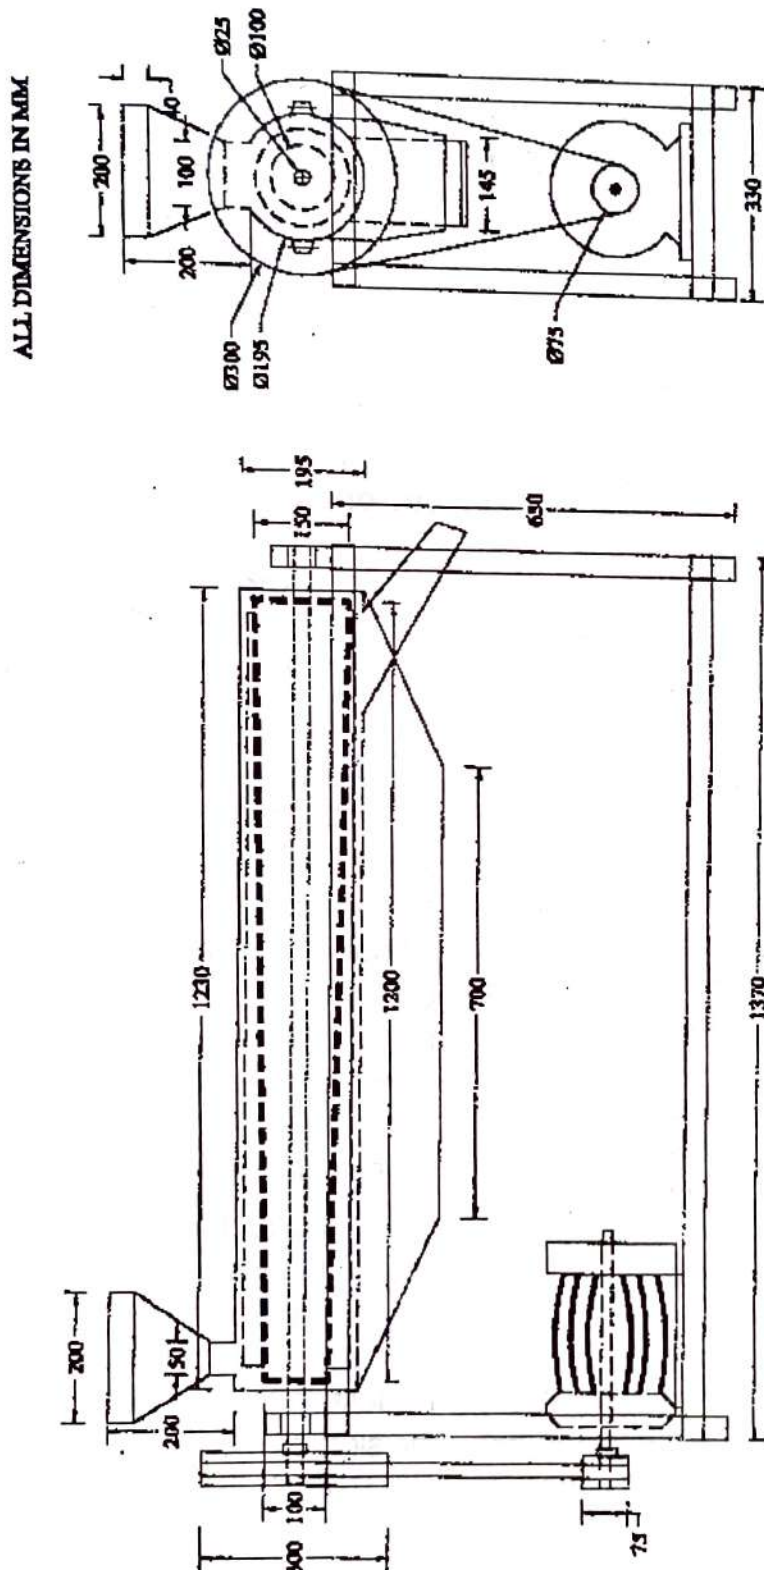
Drawing of Aonla shredding cum stone extracting machine.
